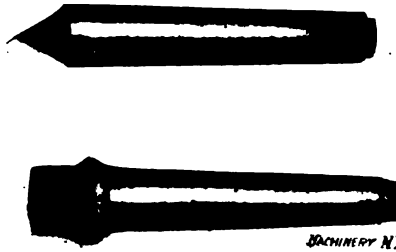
Making a lathe center with a high-speed steel cone. The welded spindle with bur, and same completed. Courtesy Thomson Electric Welding Company.
